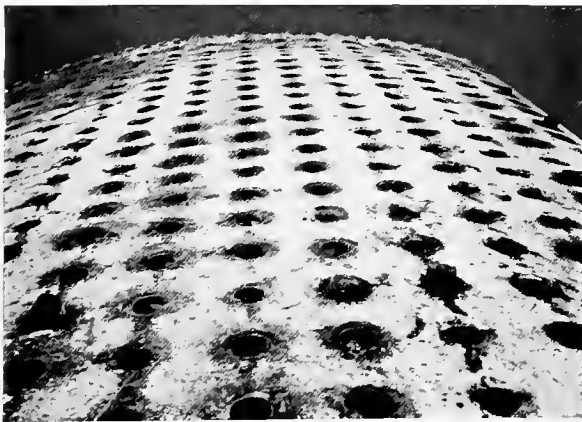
Crown-sheet showing pitting and corrosion resulting from scale accumulation. This box was removed on account of this pitting.
